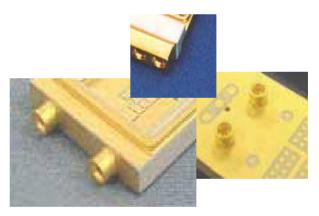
RF Connectors Brazed to Top/Bottom or Side of the T/R Module Package.
